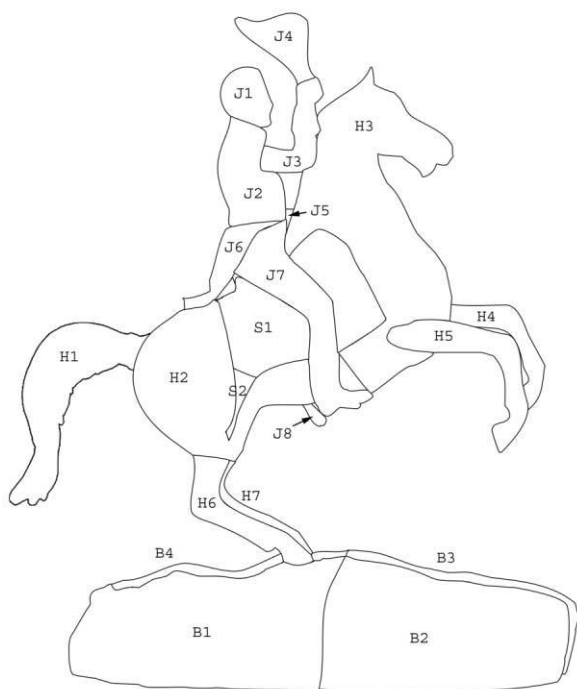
Schematic drawing of *Andrew Jackson on Horseback* showing twenty-one castings. (B) base; (H) horse; (S) saddle; (J) Jackson. (Drawing, Carol Grissom.)
